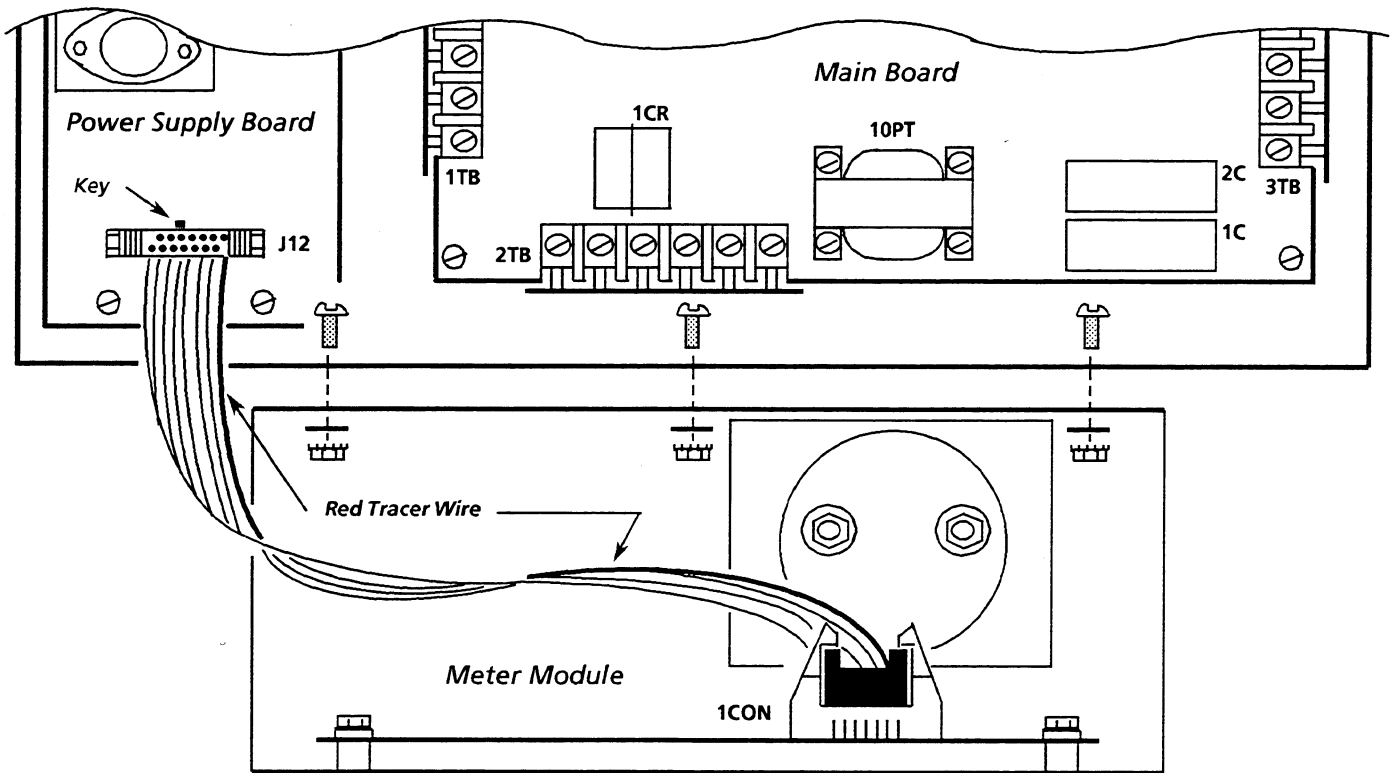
Ribbon Cable Interconnection (Rear View of Module Door)
